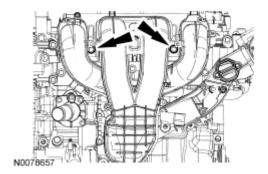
Locating Intake Manifold Bolts Courtesy of FORD MOTOR CO.
